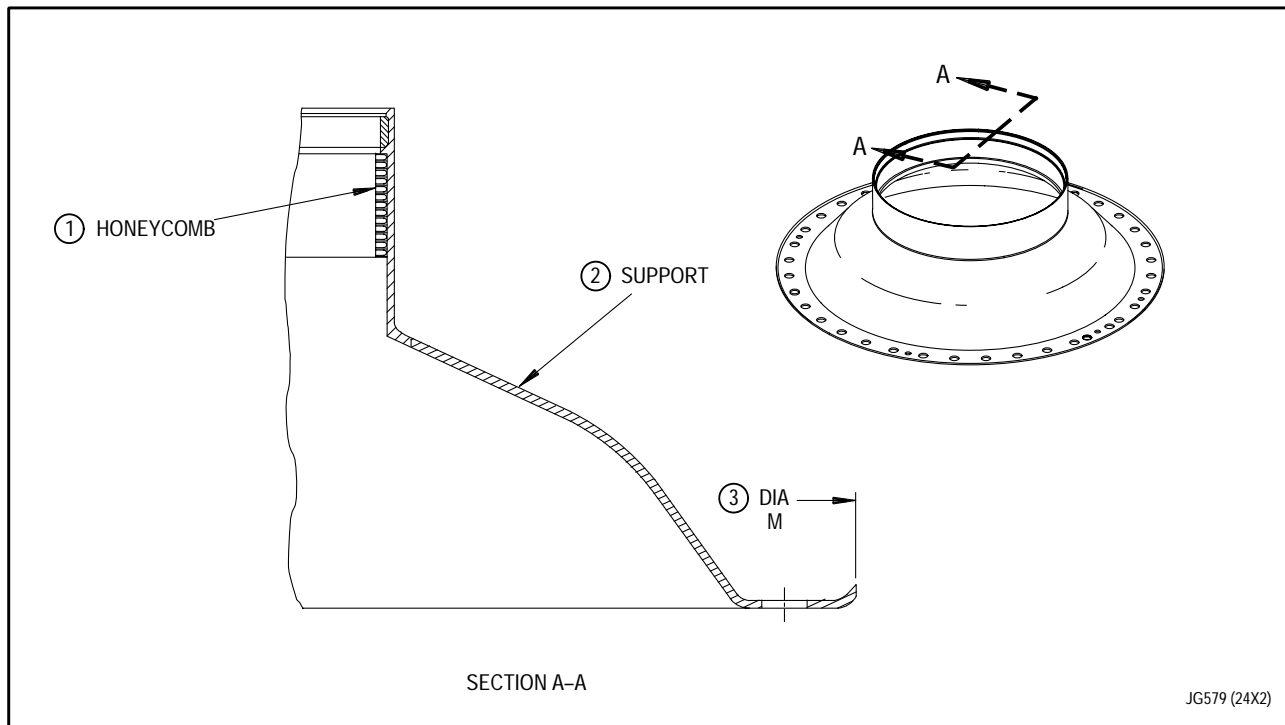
First Stage Turbine Inner Air Sealing Ring - Inspection
